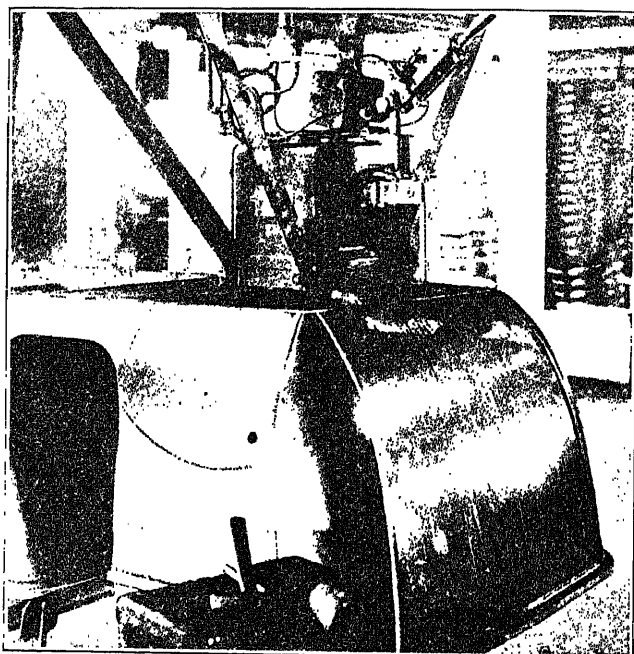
Winfield Machine with Suspended Head for Welding Automobile Bodies.
